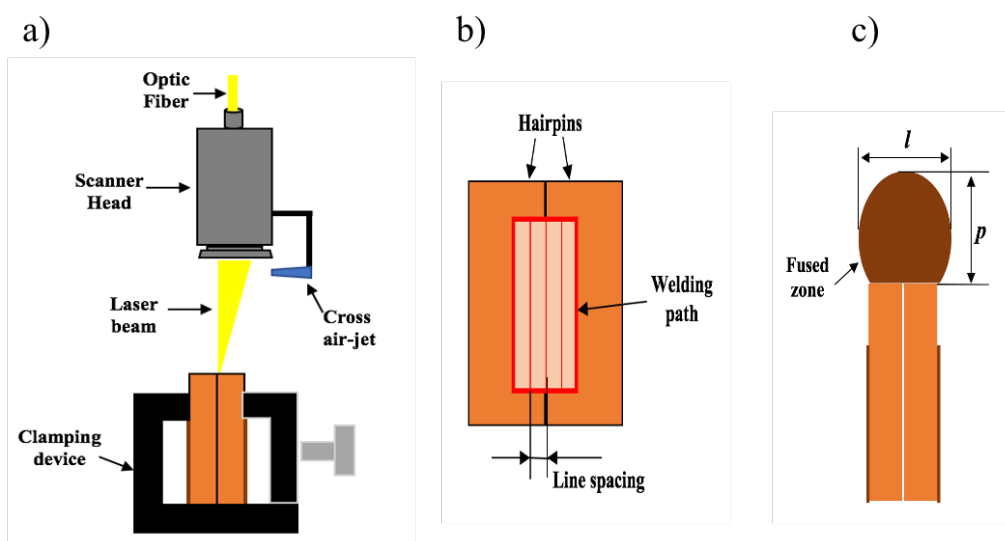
Welding setup (a), scanning strategy (b) and weld bead characteristics (c)[72].
